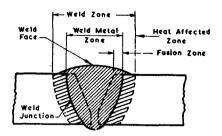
VARIOUS ZONES OF A TYPICAL WELD
